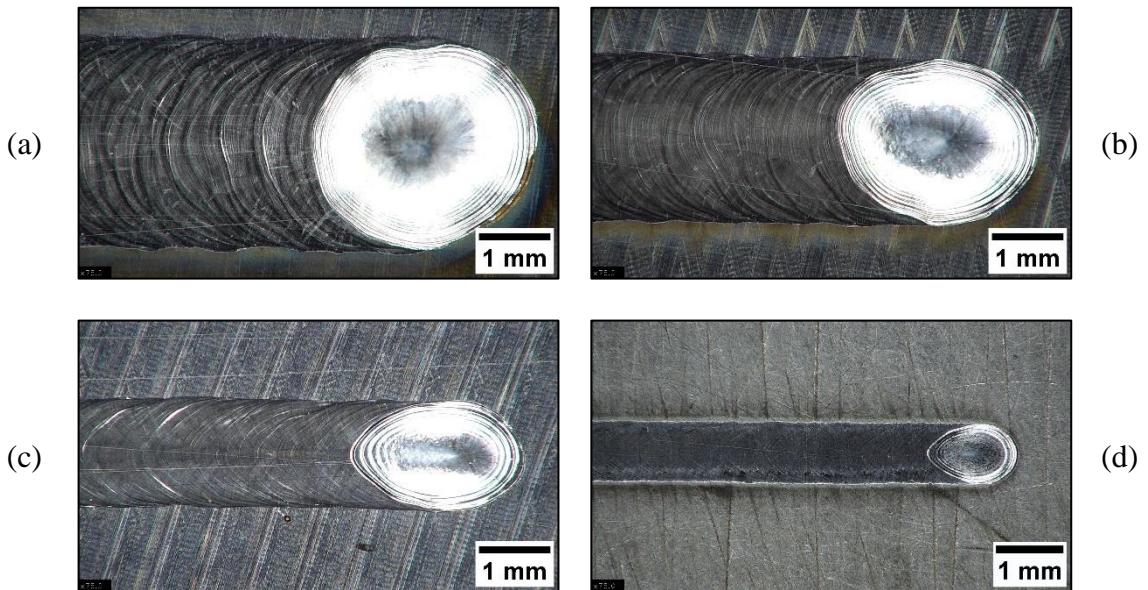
304L laser weld surfaces at 1600 W and travel speeds of 25 mm/s (a), 50 mm/s (b), 100 mm/s (c), and 150 mm/s (d).
